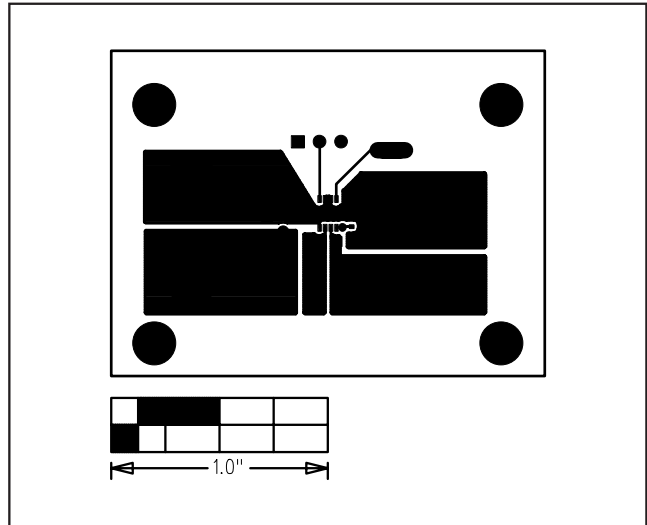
MAX1947 EV Kit PC Board Layout—Component Side
